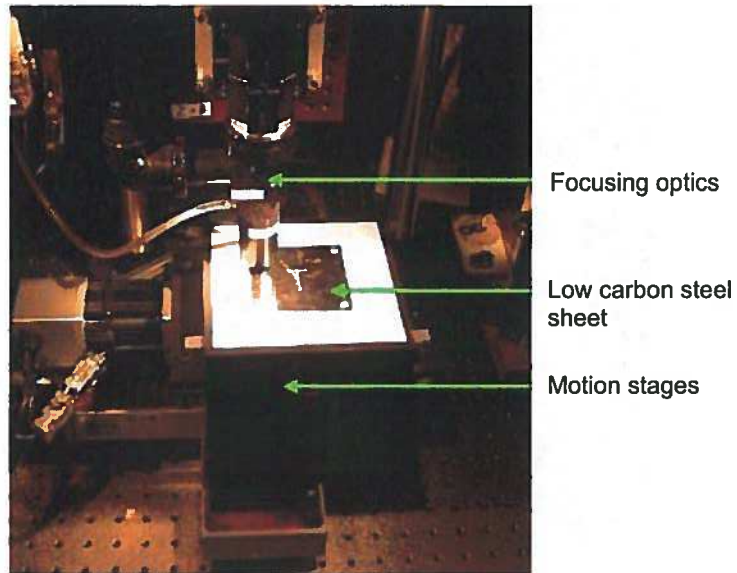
Laser micromachining station used to produce the experimental prototypes for this study. Key features include focusing optics to accurately deliver the laser beam to the work piece (low carbon steel), concentric gas nozzle to protect the optical system from particles and gasses, and a precision motion stage to translate the work piece during microfabrication.
